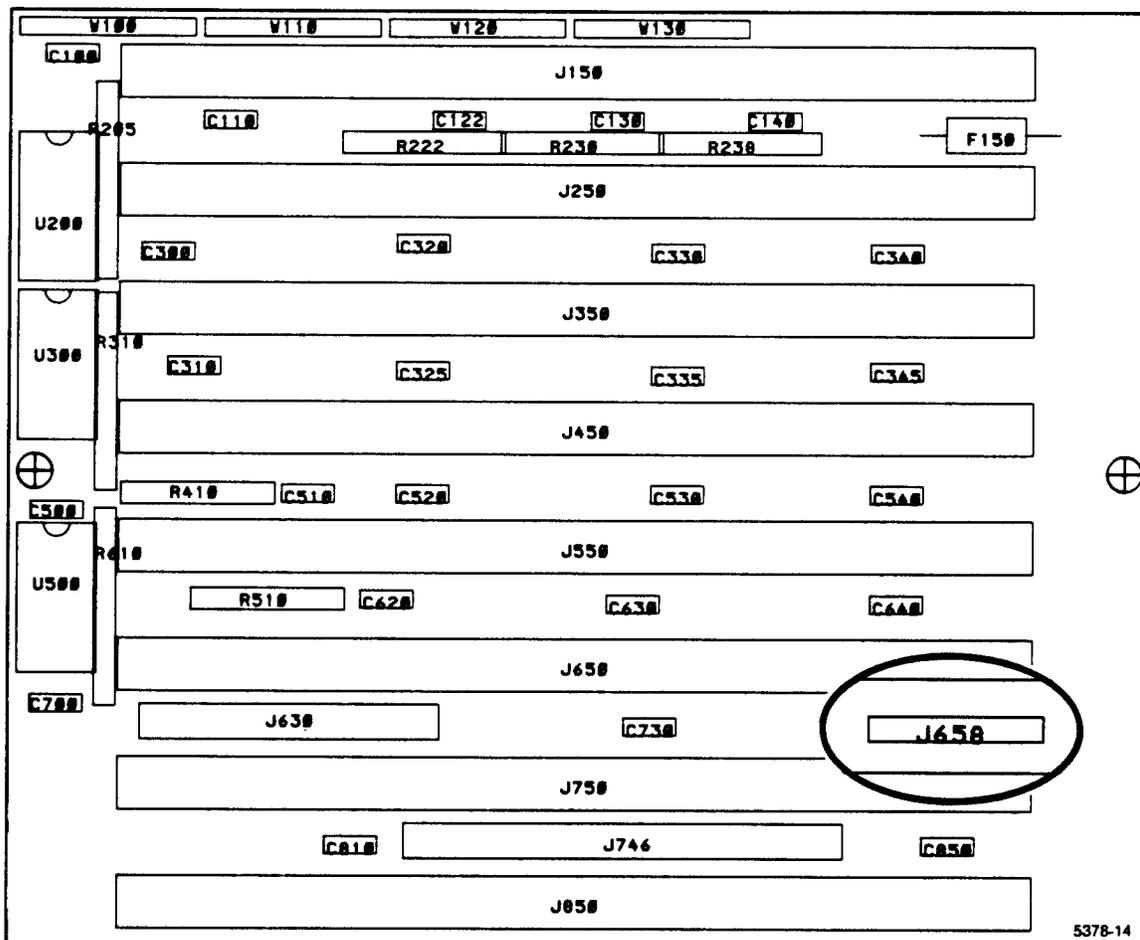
Expanded view of the Interface Board shows power supply measurement pins.
